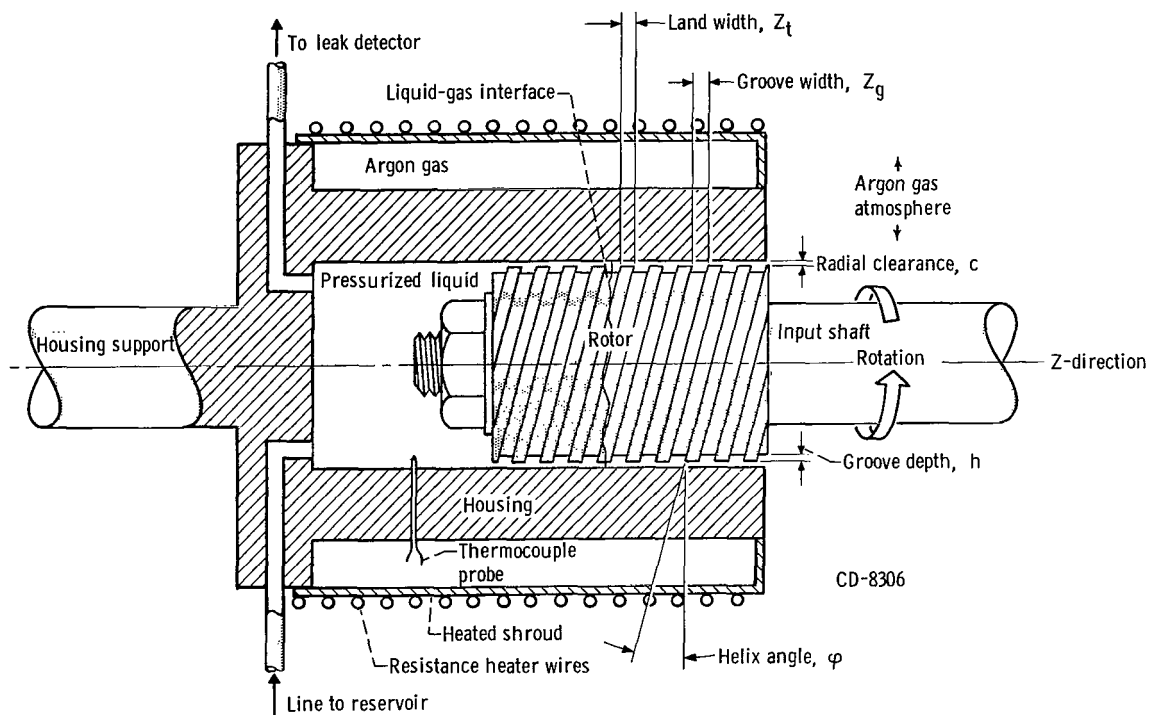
Grooved rotor viscoseal used to seal sodium.
